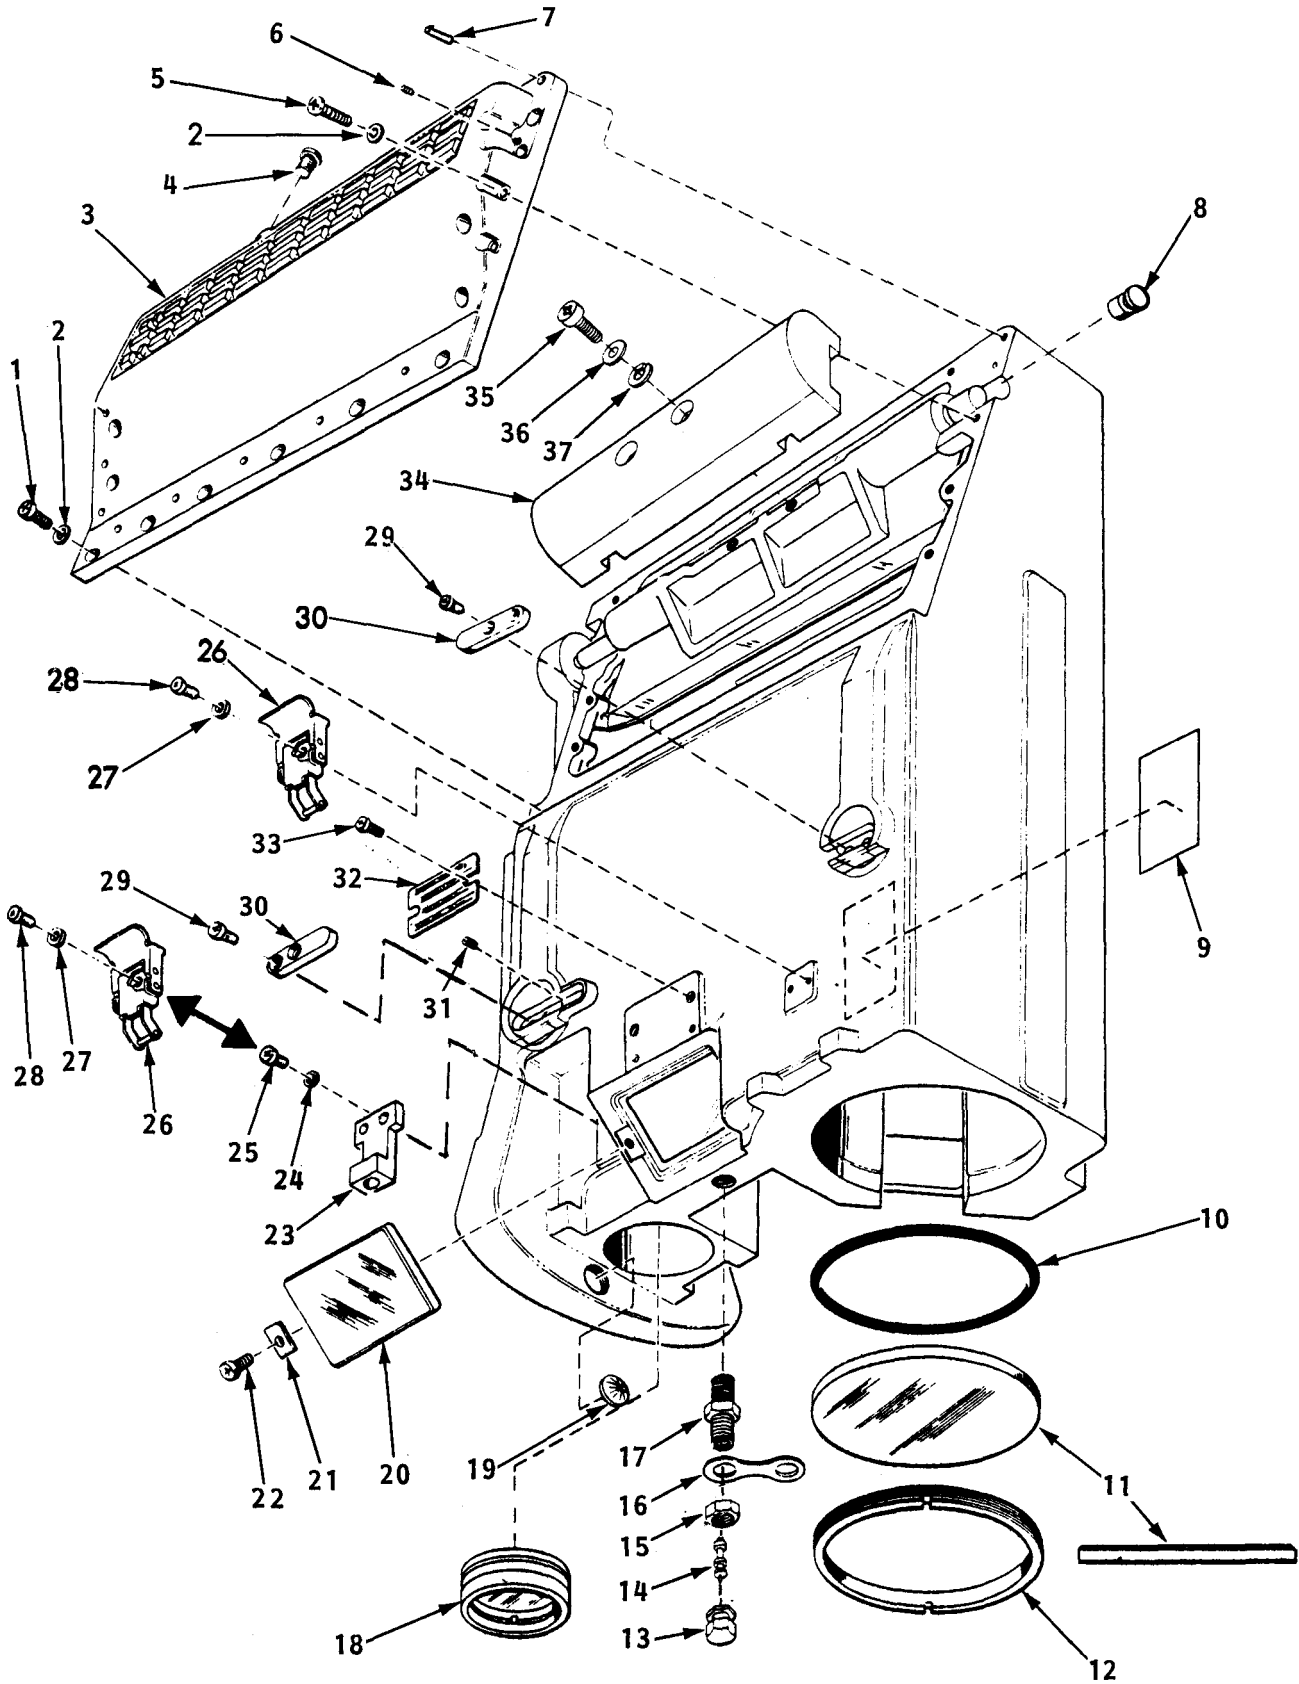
Head assembly 11727486, 10541990, and 11747439 (partial view-back)
